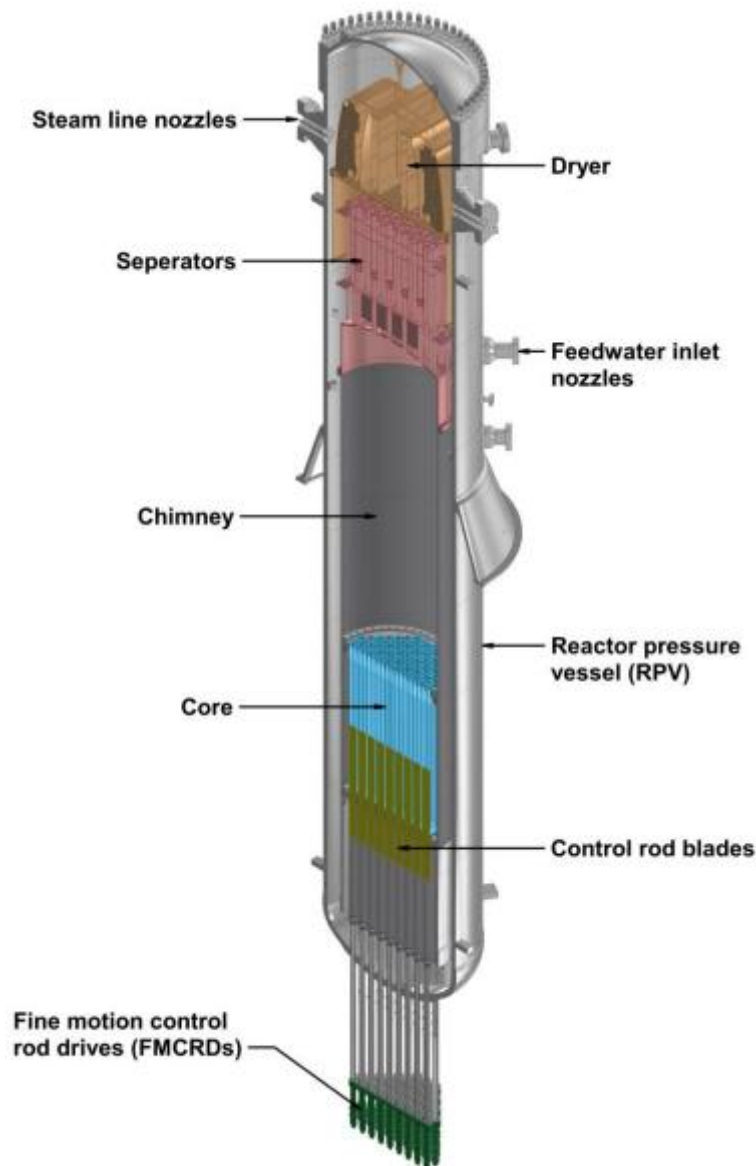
BWRX-300 Reactor Pressure Vessel and Internals. [30]
